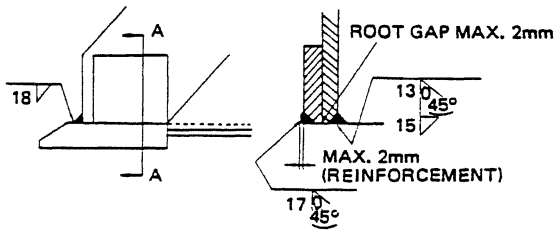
Weld Build-up in Case of Figure 2-6.
